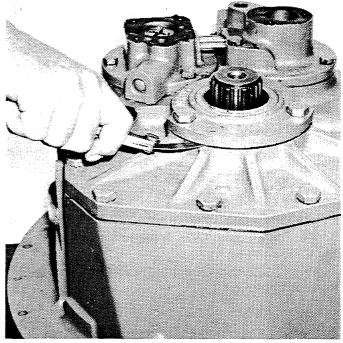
Measuring Shim Space Between Output Bearing Retainer and Rear Cover.
